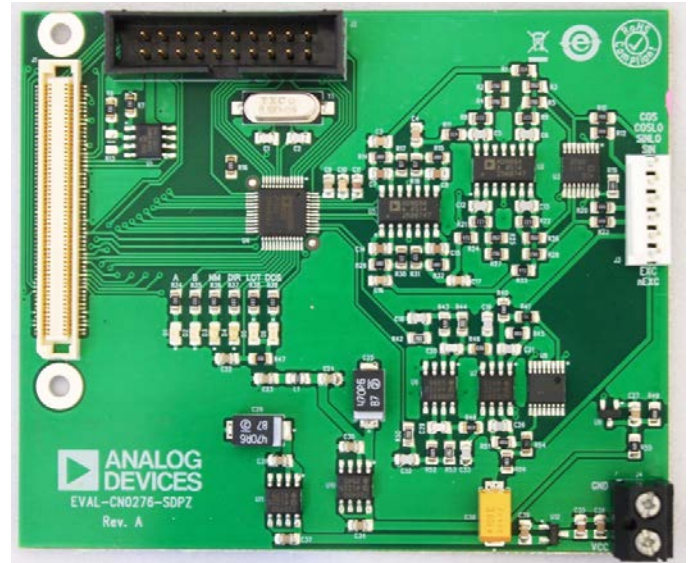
Photo of [EVAL-CN0276-SDPZ](#) PCB
